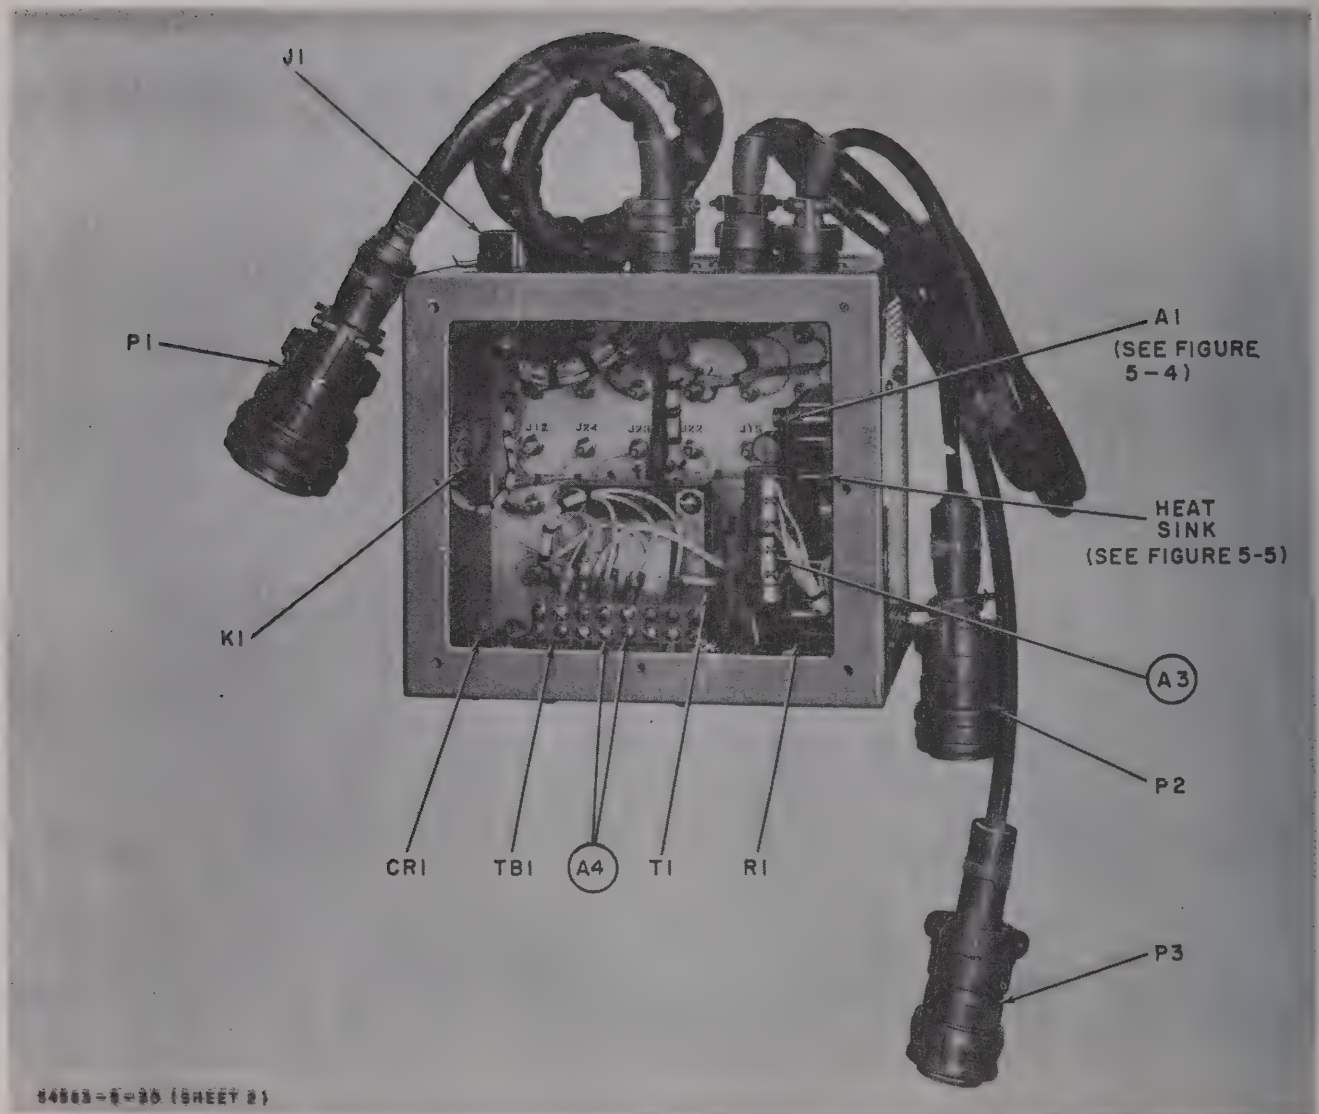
Test Adapter, MX-8152/TYA-11, Part Location (Sheet 2 of 2)
